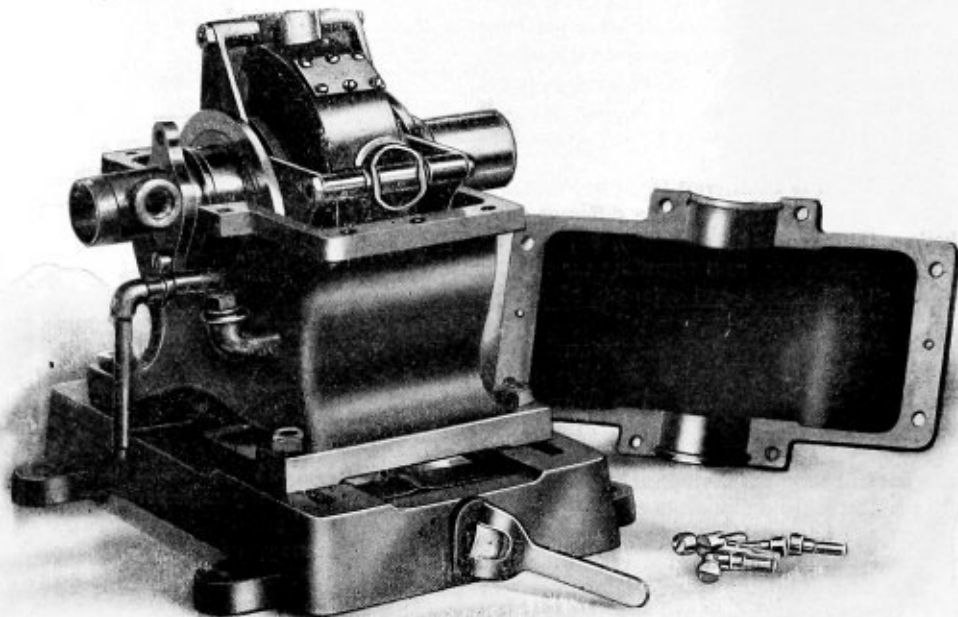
VIEW OF THE ROTARY COMPRESSOR WITH TOP OF CASE REMOVED.
